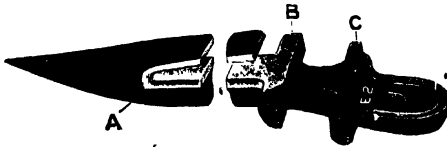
WROUGHT-IRON FINGER WITH HARD STEEL WELDED LINING, A; AND DOUBLE WINGS OR SHOULDERS, B, C. [Kearsley.]
